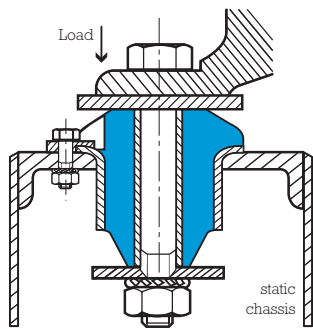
Fixing between the equipment and a metallic chassis (failsafe in mobile applications).
